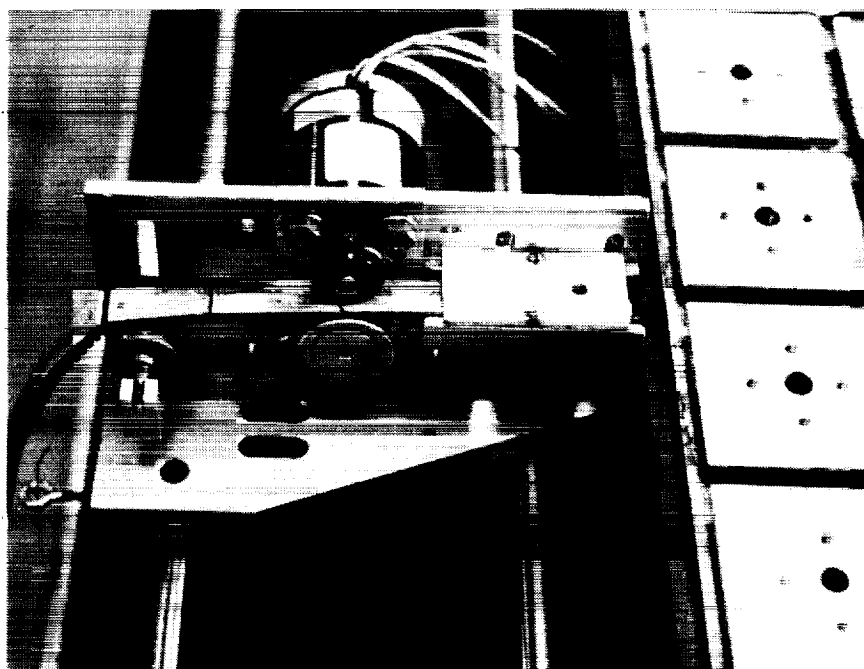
DRIVING UNIT OF THE 2-STEP MACHINE
